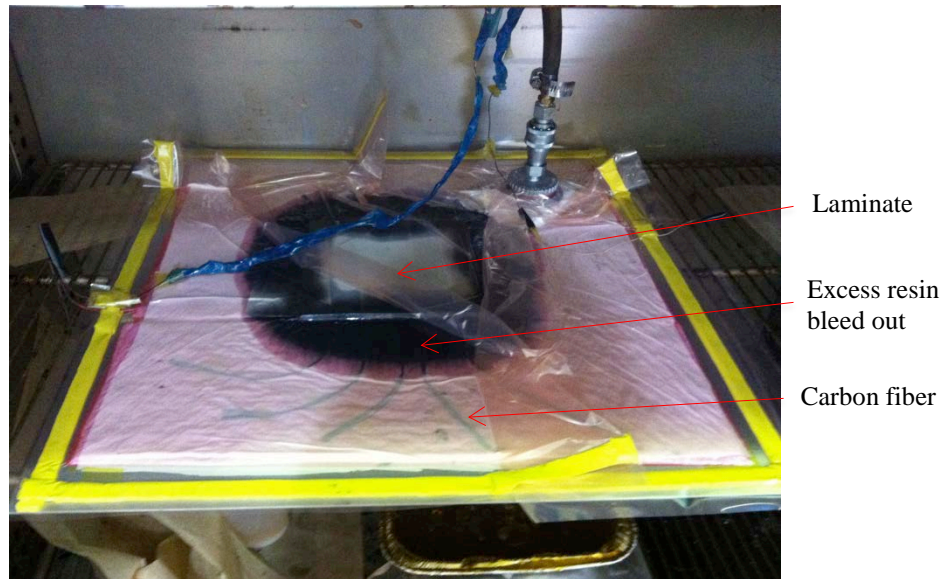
Vacuum bagging of a CB-filled glass/epoxy plate before curing.
